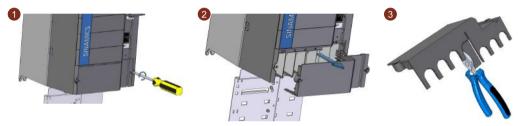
Removing the connection cover and making openings, FSF/FSG
